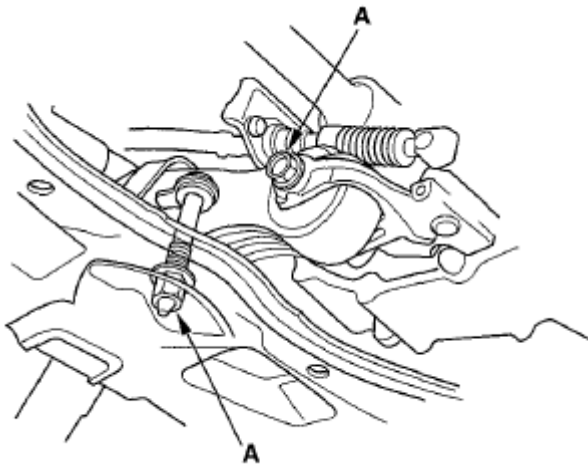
Identifying Torque Rod Mounting Bolt & Nut - A/T Model
